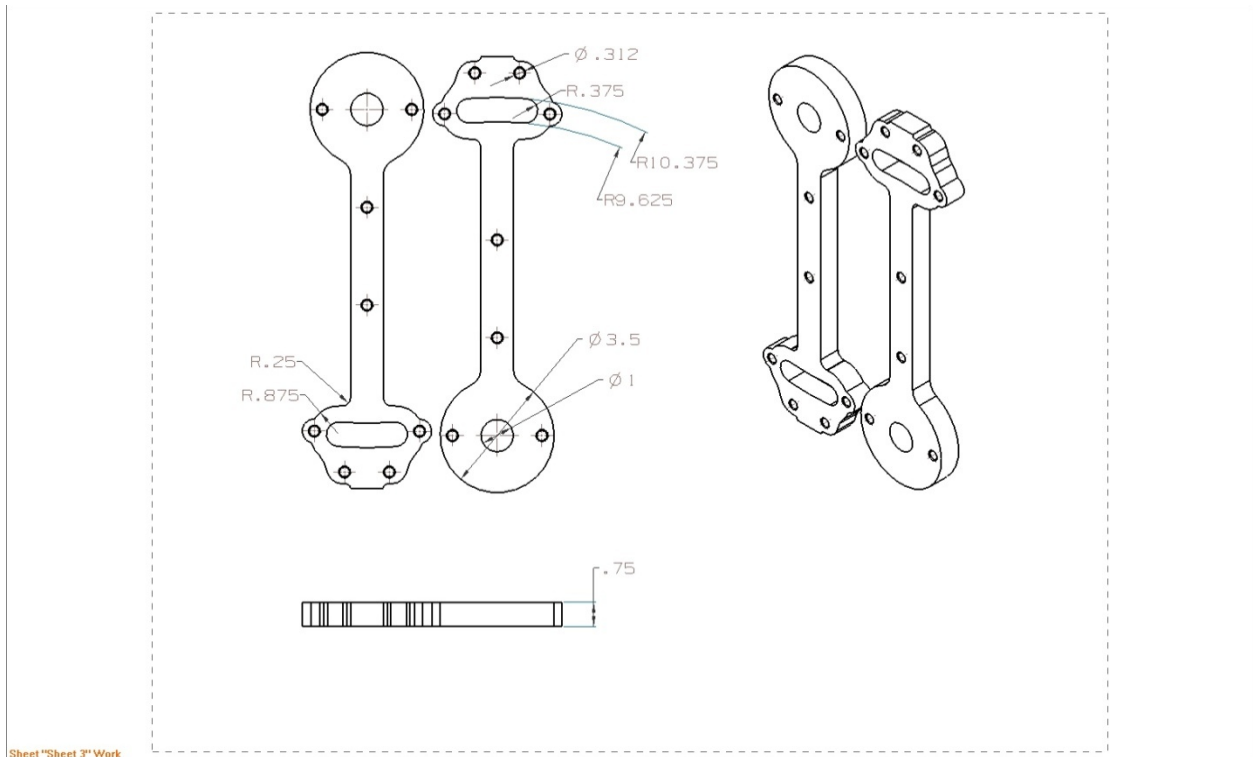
Dimensioned Drawings for the Two ¾" Halves of the Lower Pendulum Arm Assembly
